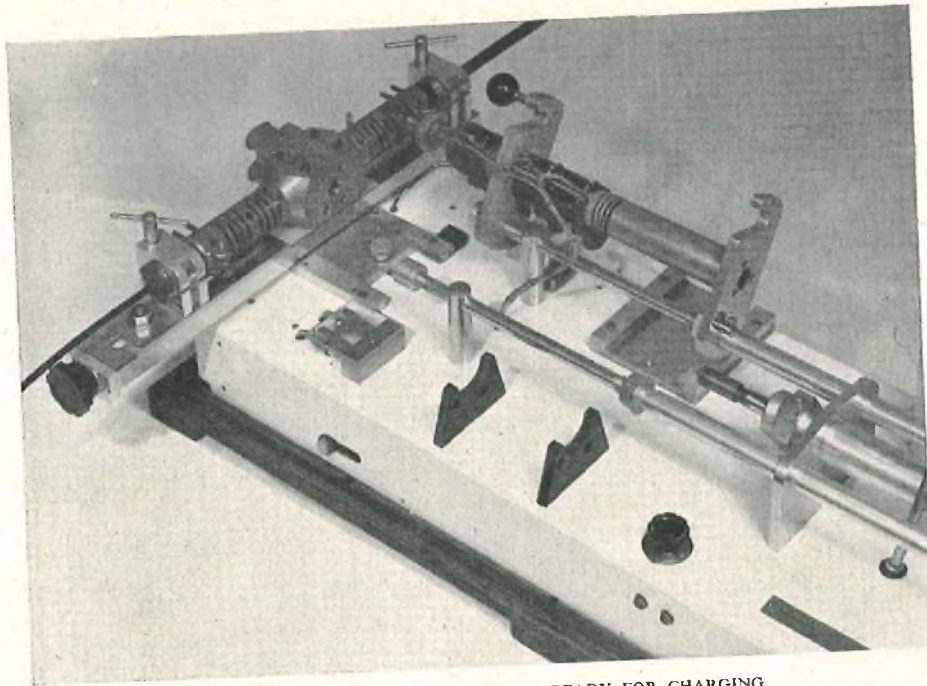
JOINTING MACHINE. BARREL READY FOR CHARGING
